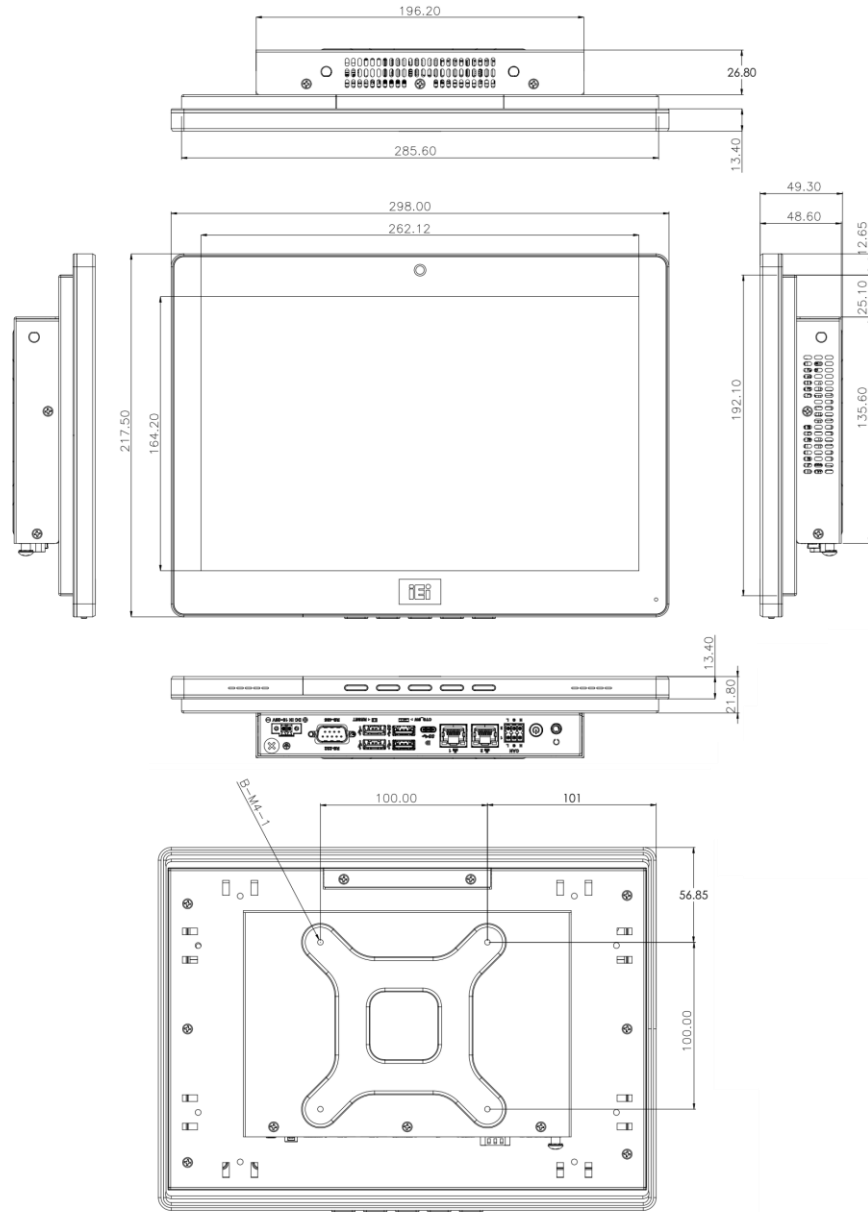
AURA-W121-RK3576 Dimensions (mm)
